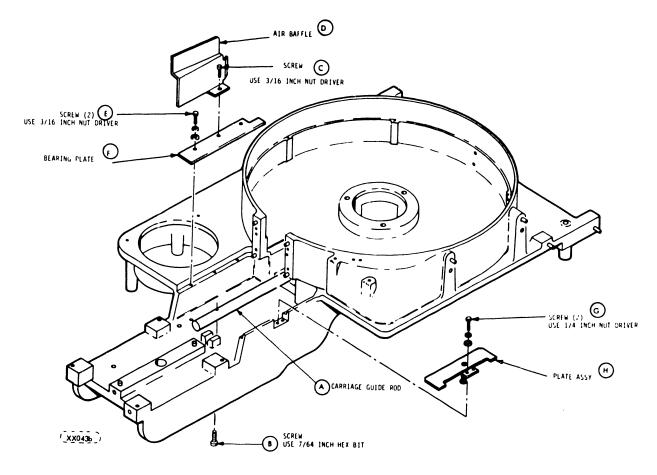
CARRIAGE GUIDE ROD REMOVAL AND REPLACEMENT
